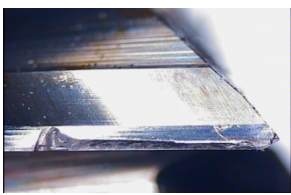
Chipping on flute 3 of the tool using palm oil coolant condition
